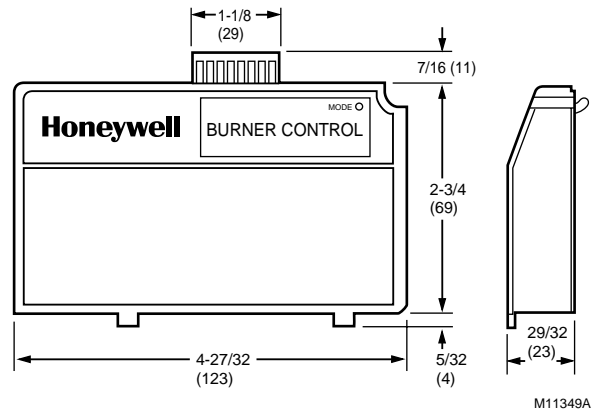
Mounting dimensions of S7810M ModBus™ Module in in. (mm).
